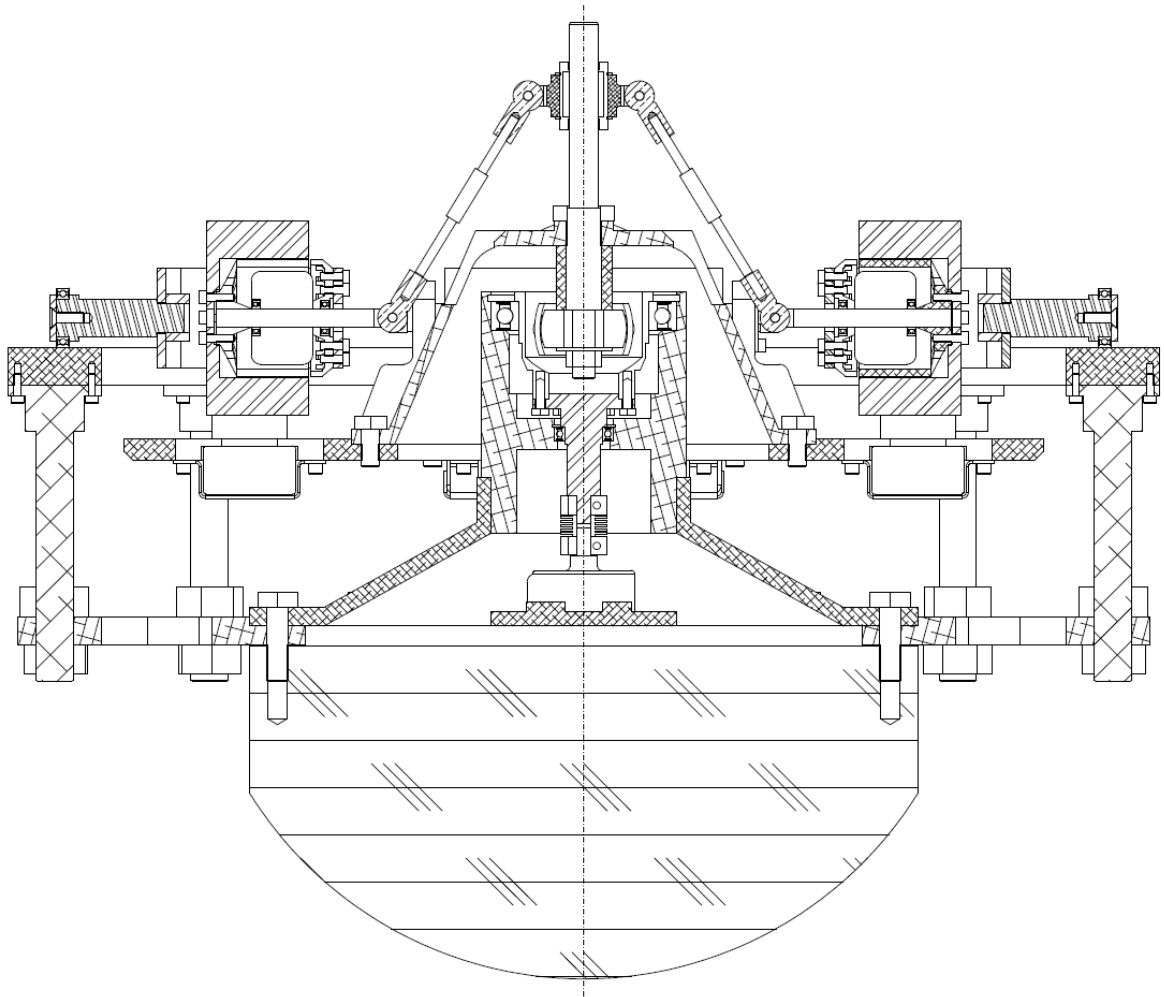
Cross section view of the general assembly for the final stable platform conceptual design
